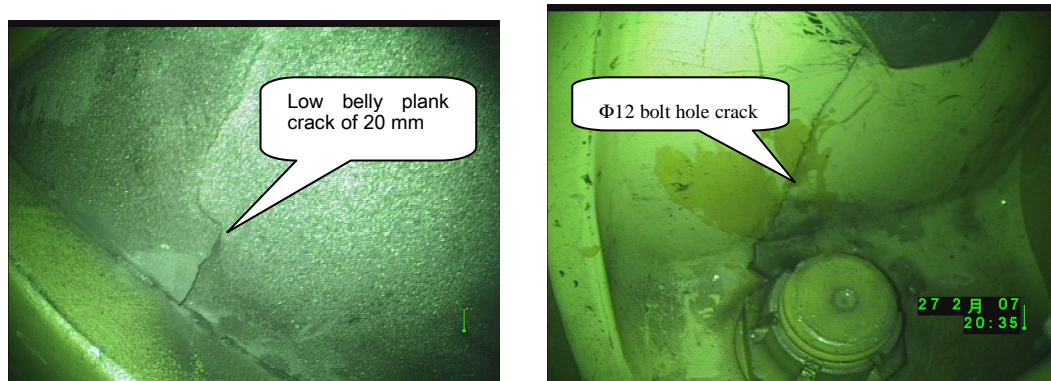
cracks at low belly plank of #× right central wing wall and at $\Phi 12$ mm bolt hole
